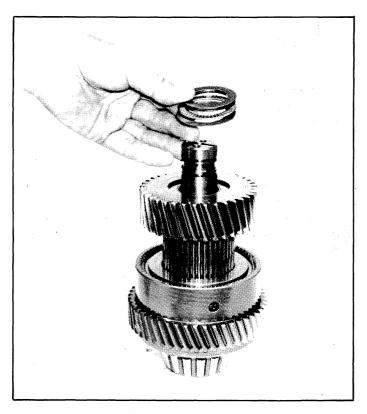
Removing or Installing the Rear Thrust Bearing, Spacer and Washer from the Reverse Clutch Shaft.
